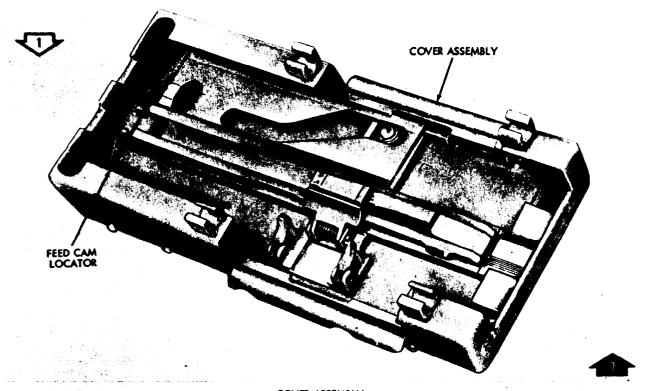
Disassembly / assembly of machine gun. (4 of 4)
